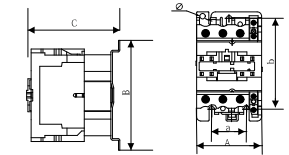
Outline and Installation Dimensions of CJX2-40~95 AC Contactor
